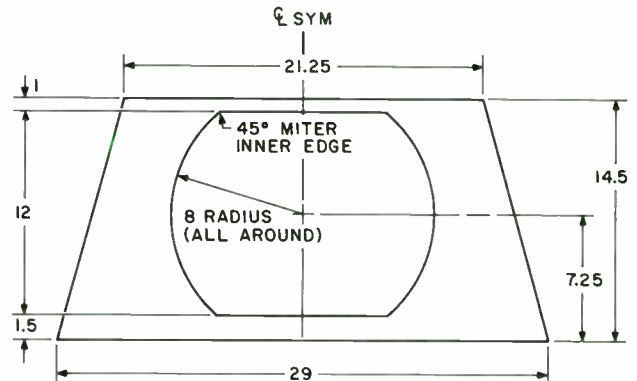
Cutting guide for the flared outer well plate. Use ¼-inch particle board.
